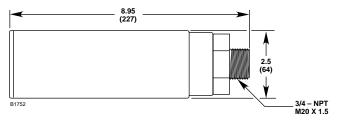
Aluminum PointWatch Unit Dimensions in Inches (MM)
